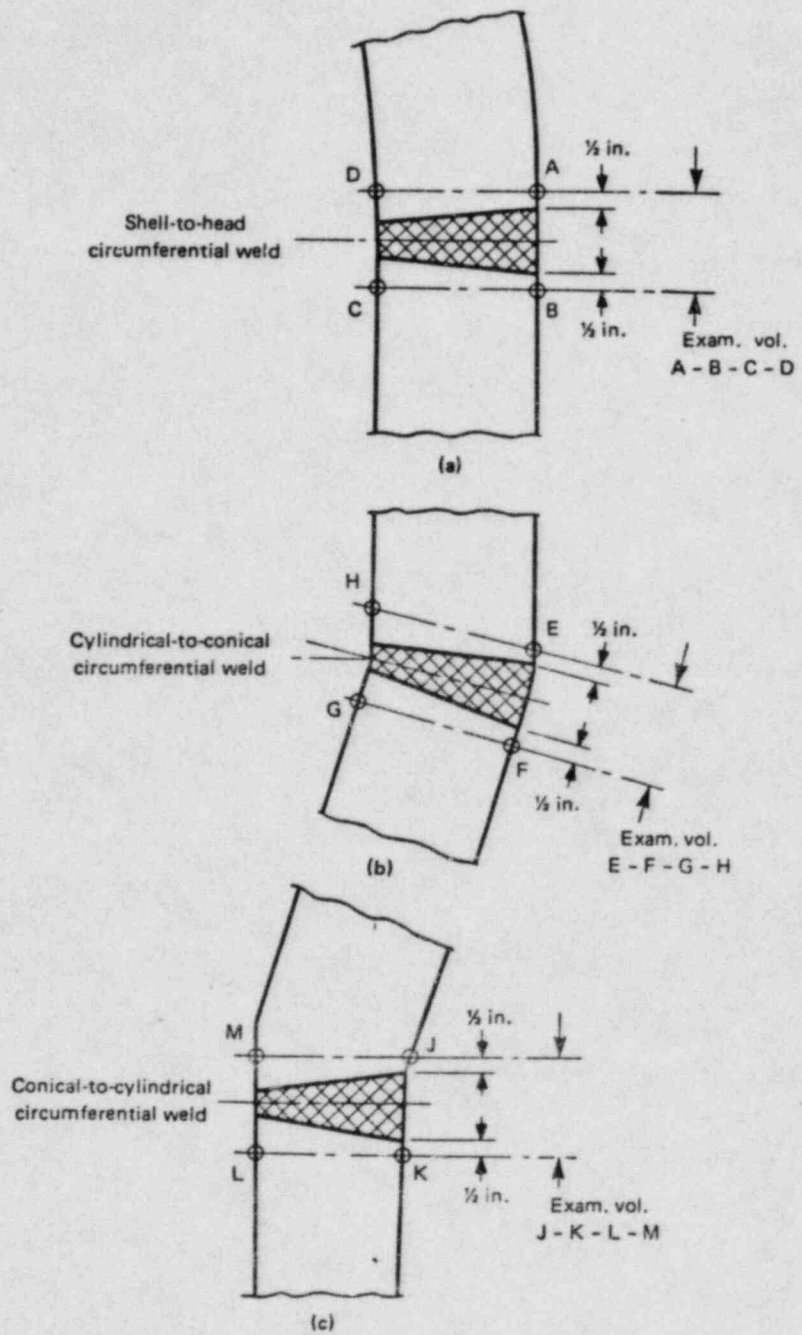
VESSEL CIRCUMFERENTIAL WELDS
